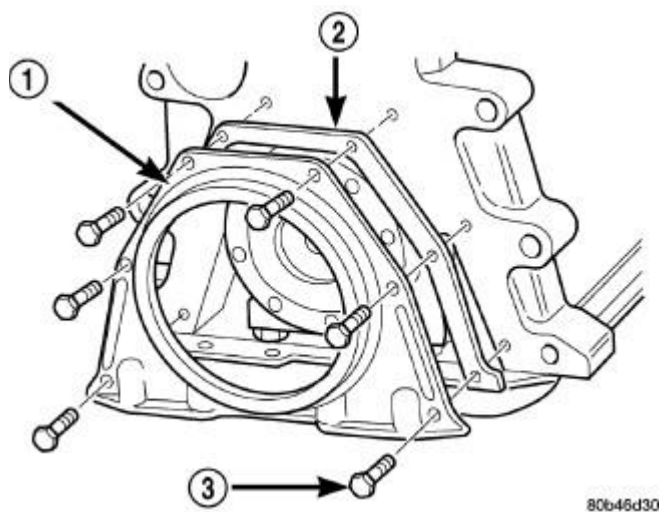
Crankshaft Rear Seal Retainer and Gasket
